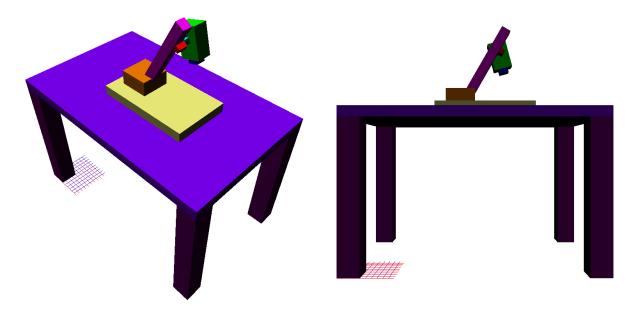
Doc-cam Assembly in WCS space with rotated shaft and camera
